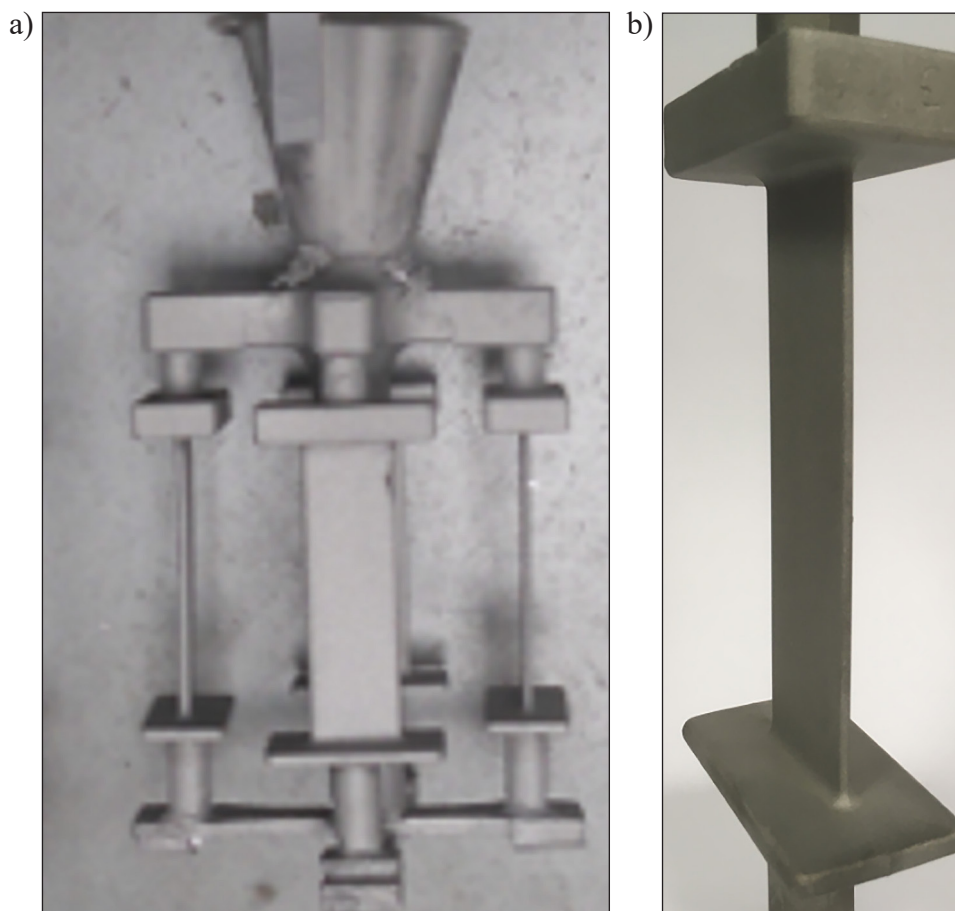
Demonstration casting for hot-tears evaluation: (a) casted mould after cleaning, (b) casting sample
